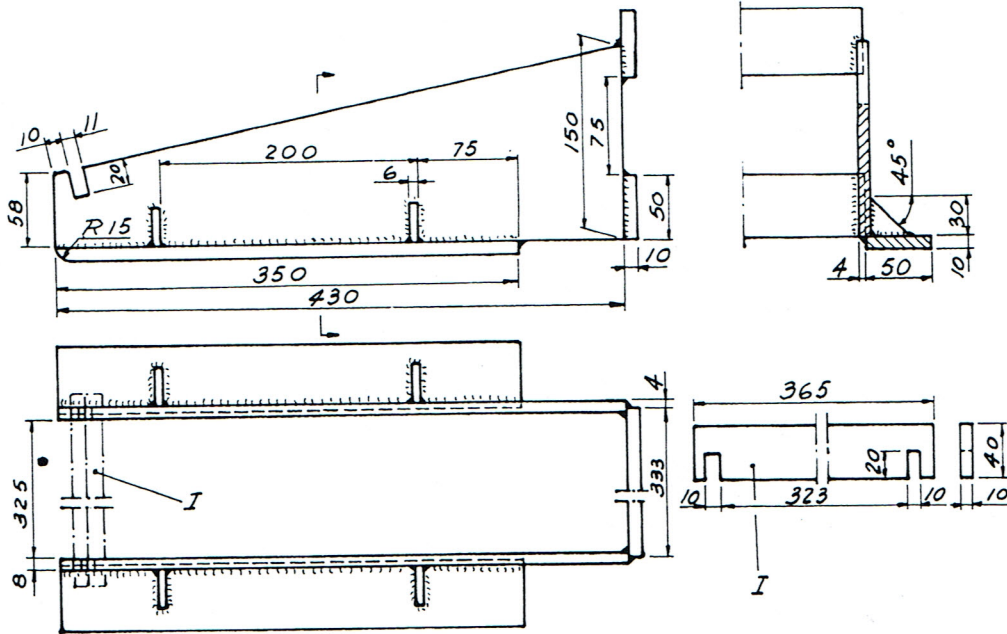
Assembly support, to be manufactured of material SIS 1311
